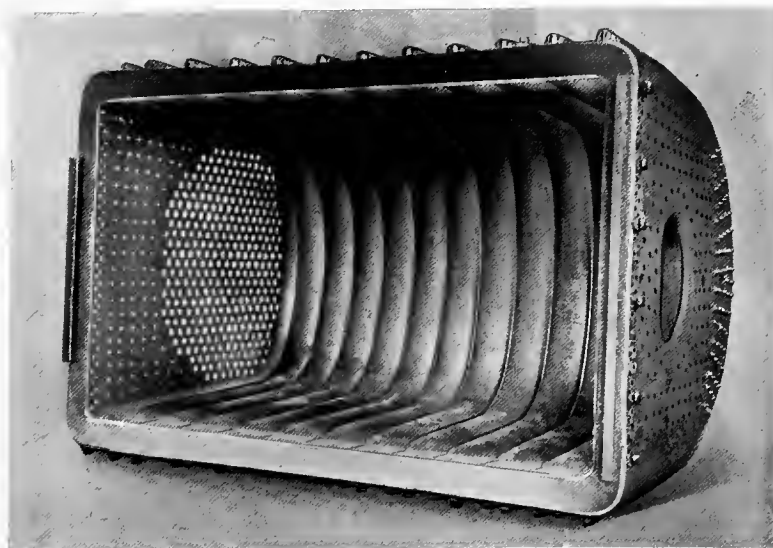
Interior of Jacobs-Shupert firebox with butt-welded mud-ring joint. Lehigh Valley Railroad.
